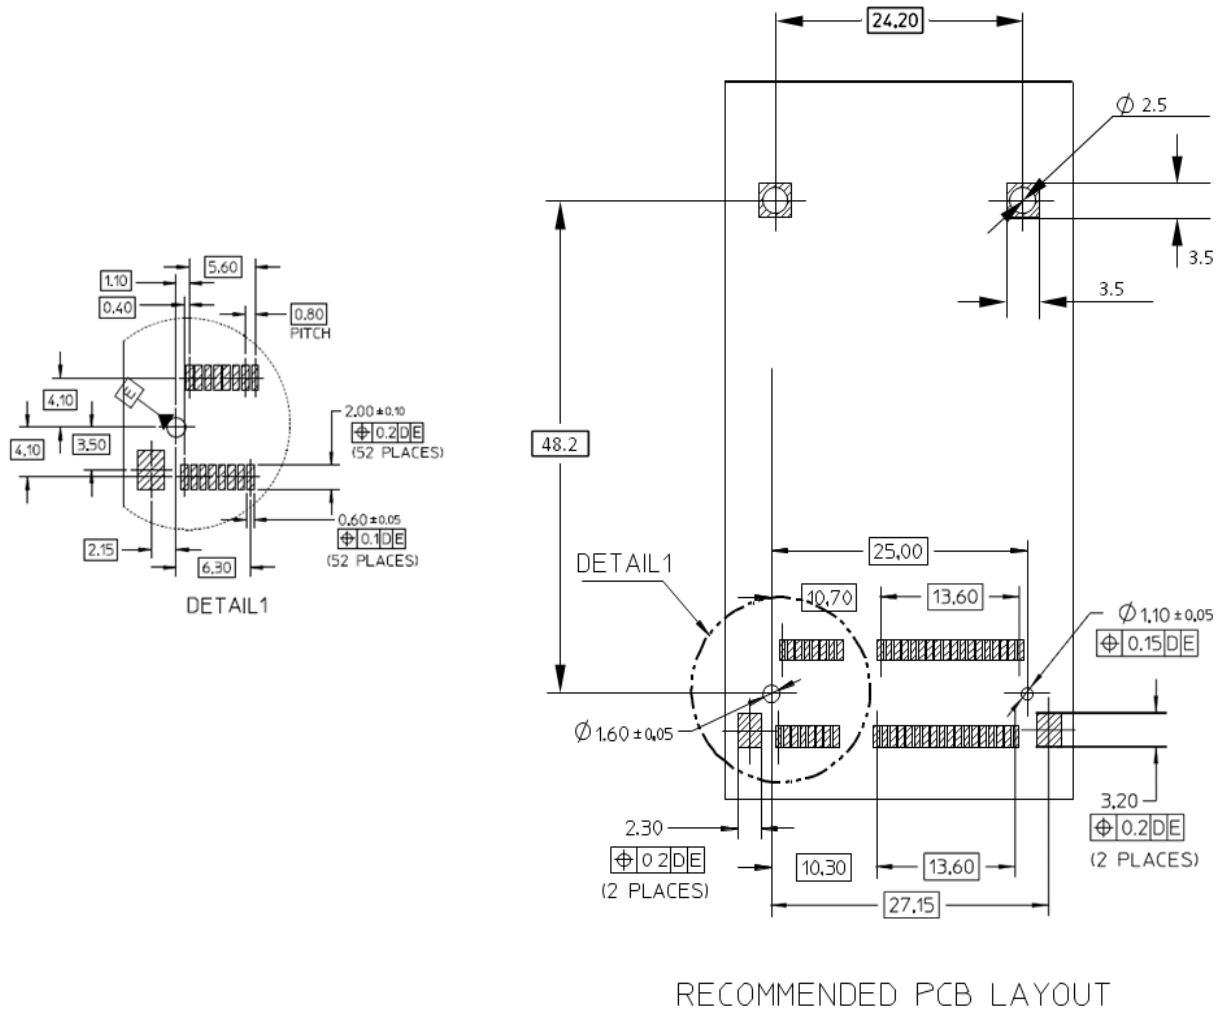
RECOMMEND PCB LAYOUT FOR MOUNTER
